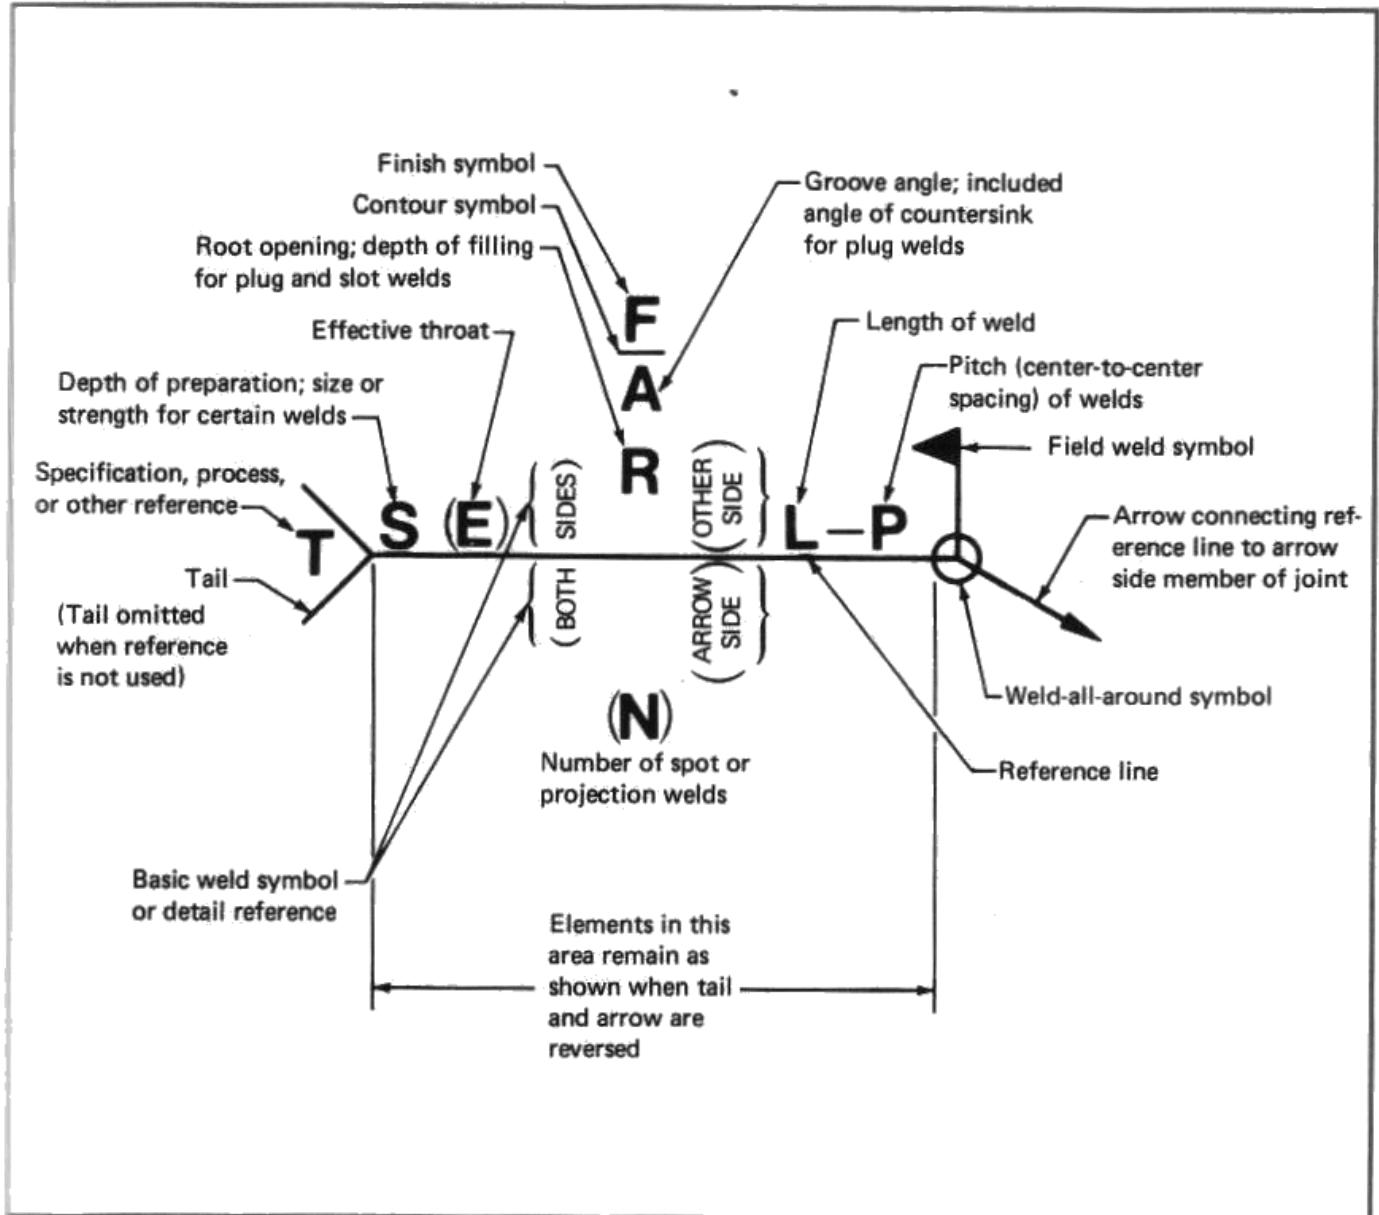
This complete symbol includes all possible elements of the welding symbol. (Courtesy American Welding Society.)
